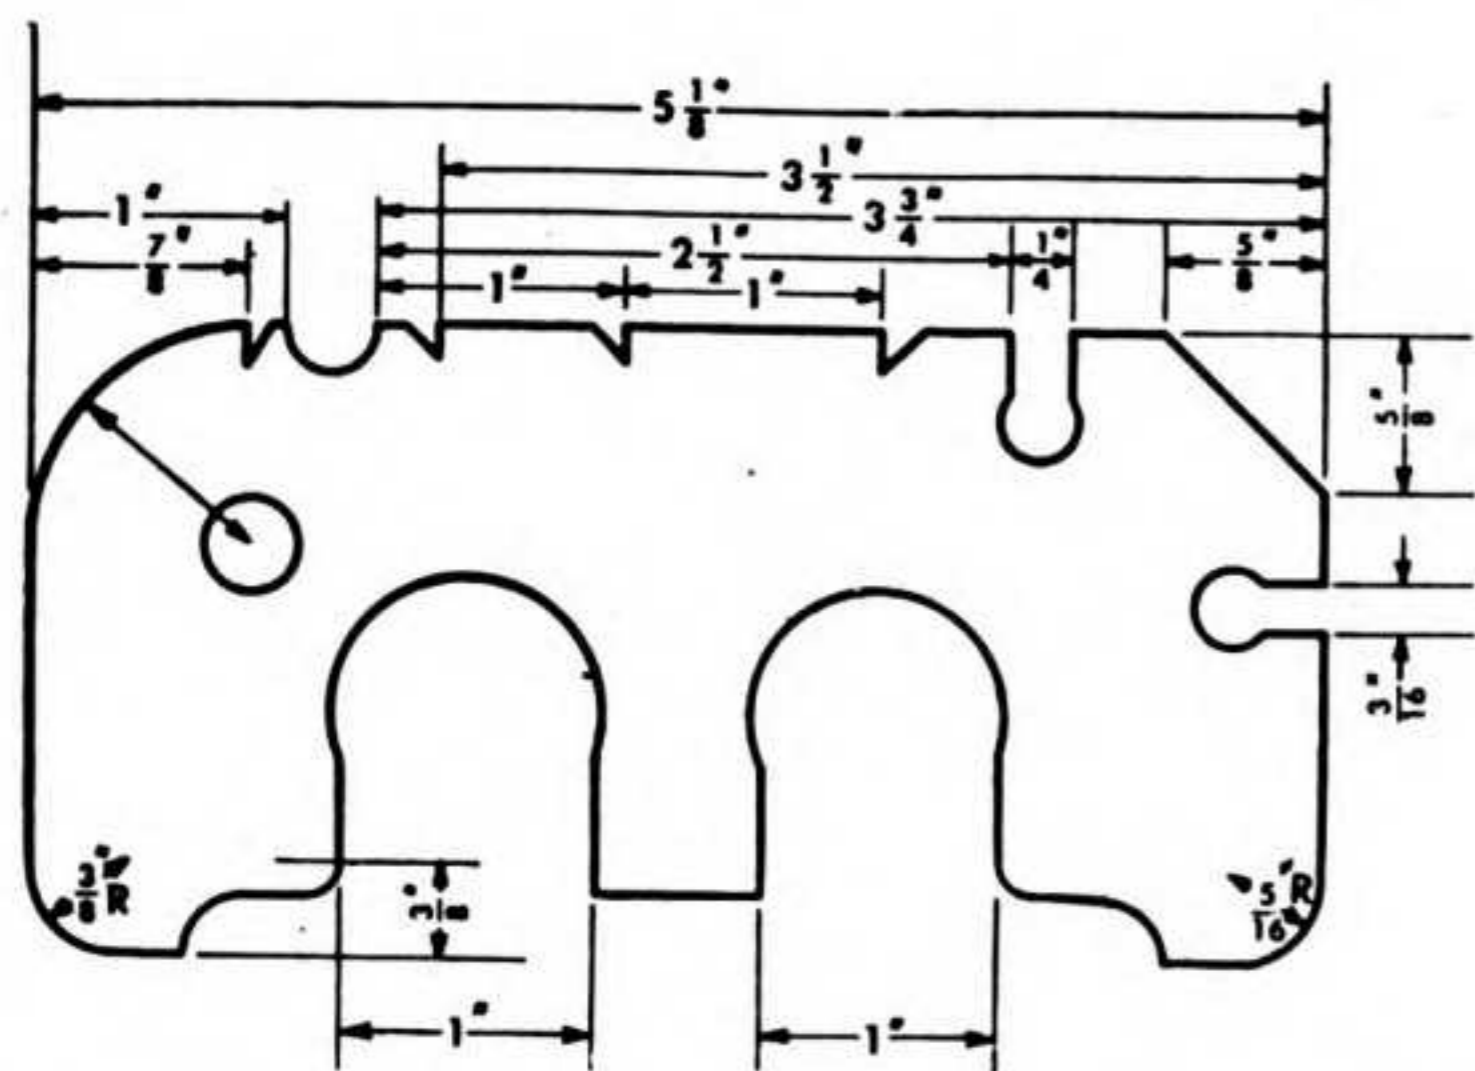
Wheel defect, worn coupler limit, worn journal collar and journal fillet gauge. (T. C. Stock No. 41-4012-19-020.)
